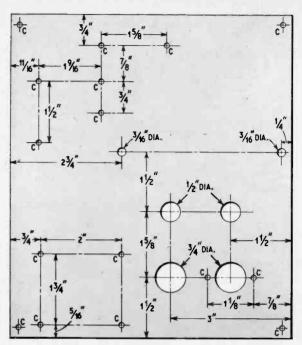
Drilling details of the back panel made from 16 s.w.g. aluminium sheet. Holes 'C'—No. 26 drill
